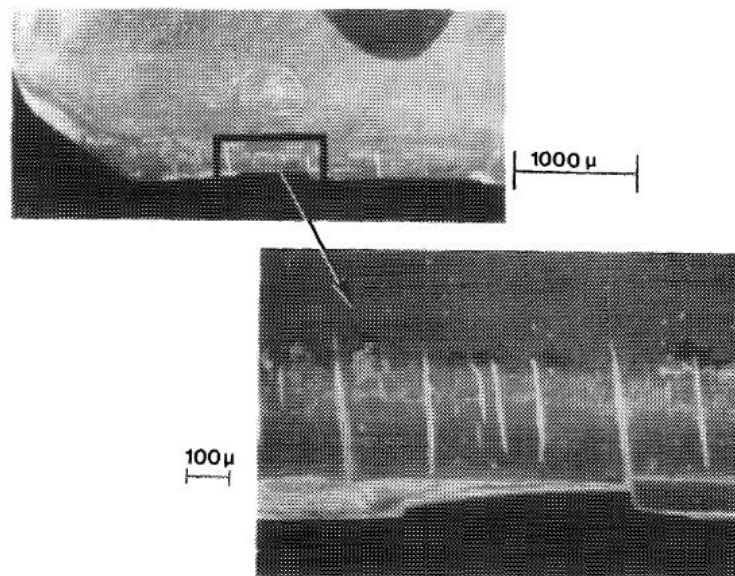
The vertical cracks on the cutting edge [28]
